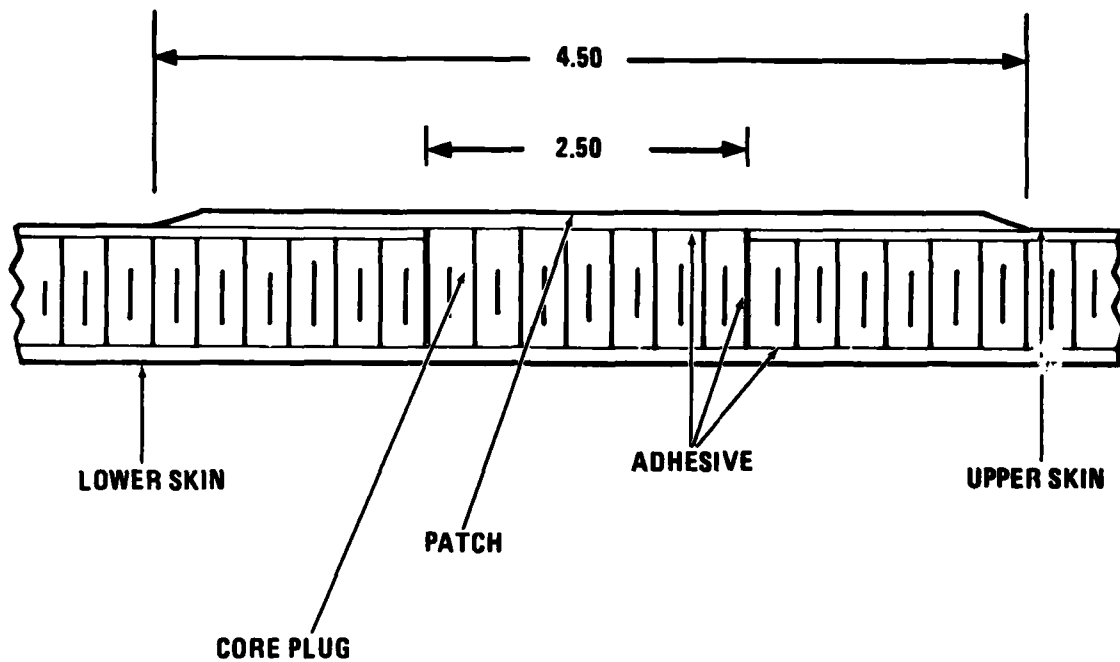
CROSS SECTION OF TYPE III REPAIRED SPECIMEN
